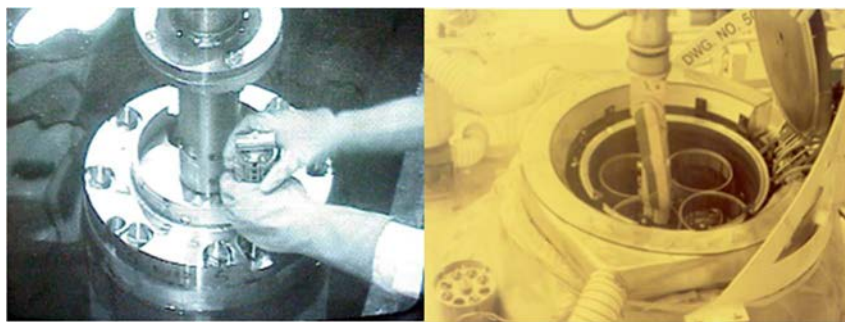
Installation and removal of sintered metal filters (courtesy of INL).
